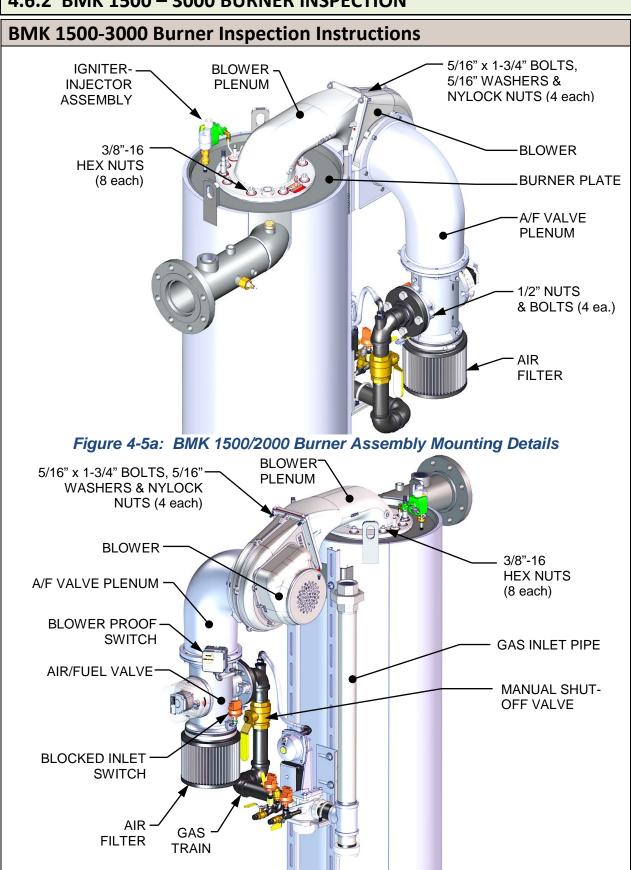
BMK 1500/2000 Burner Assembly Mounting Details
